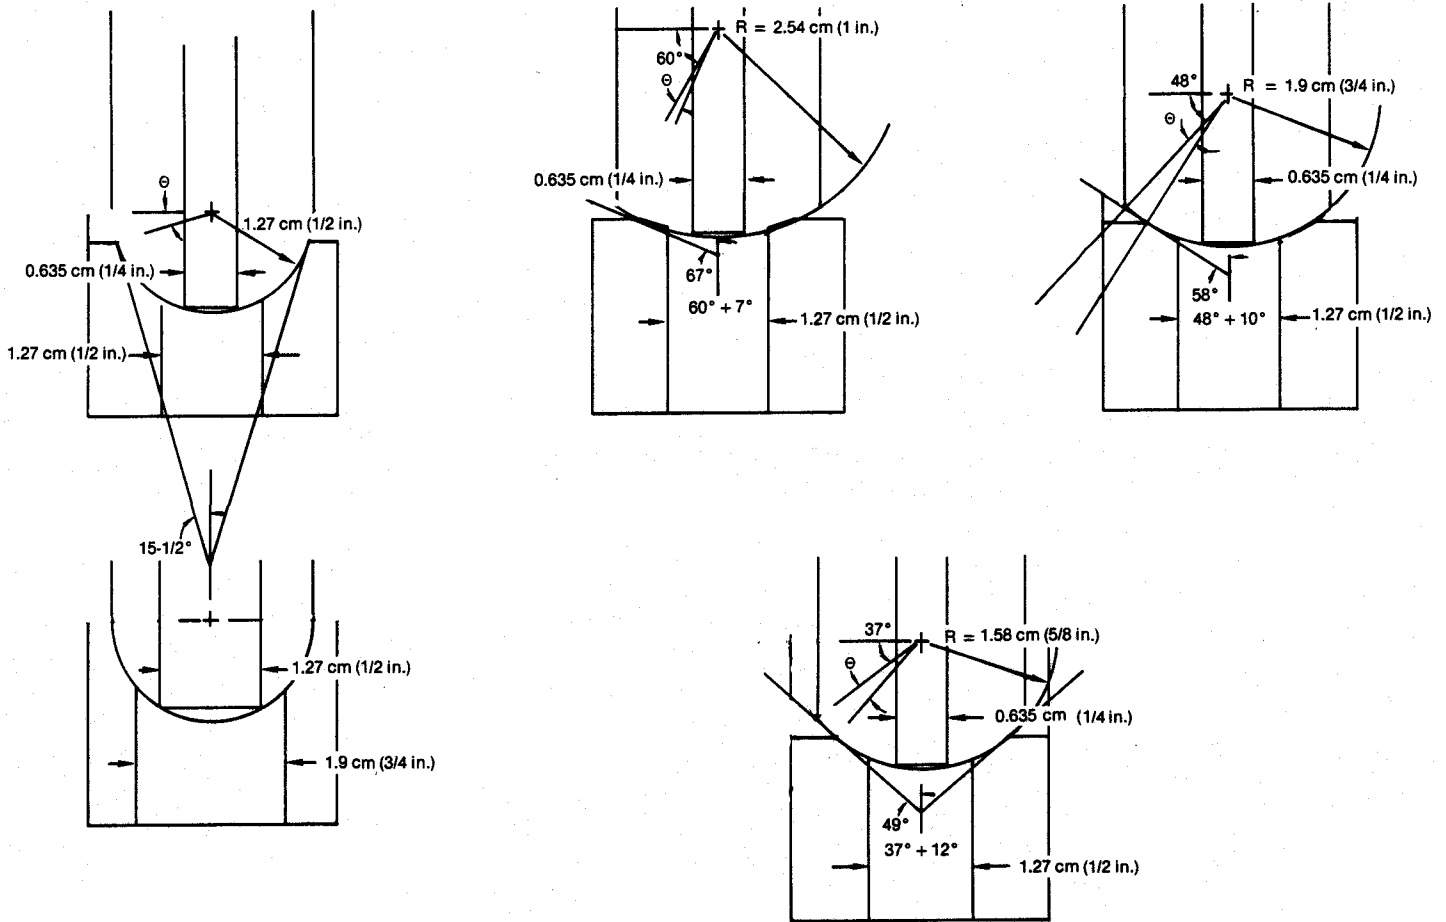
Ball and Socket Joint (Cut Back Surfaces)
